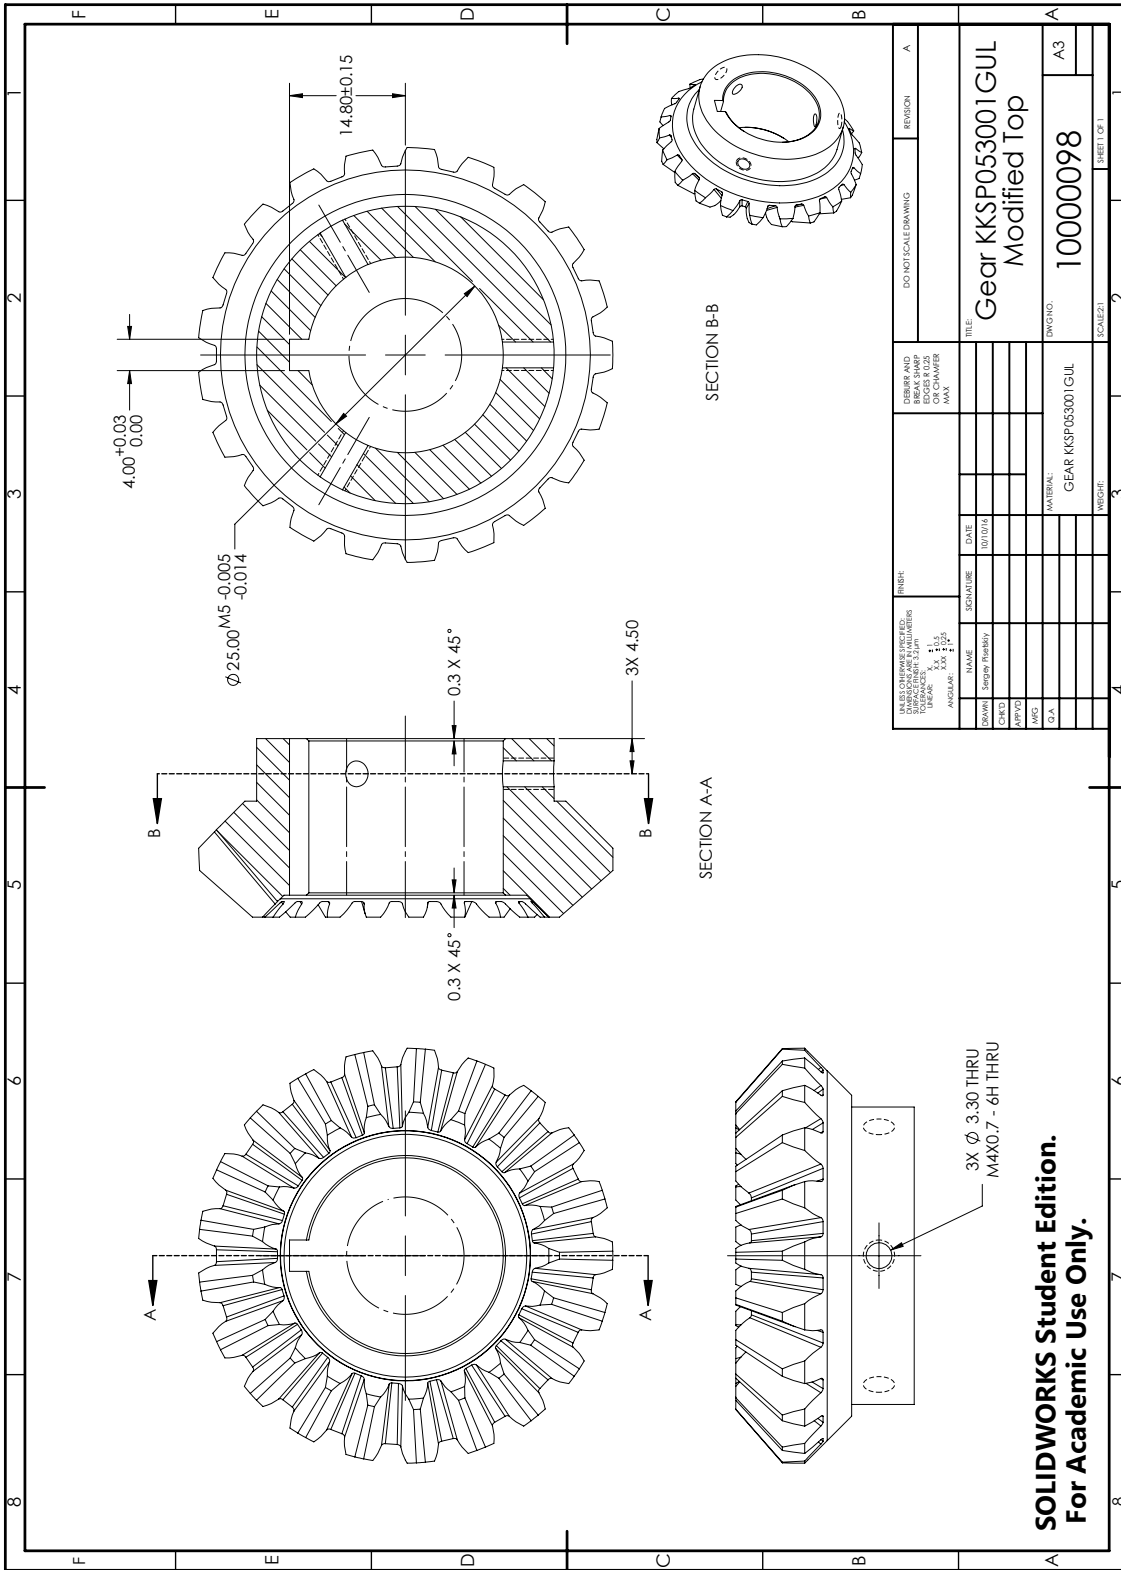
Drawing: Gear KKSP053001GUL modified, top.
